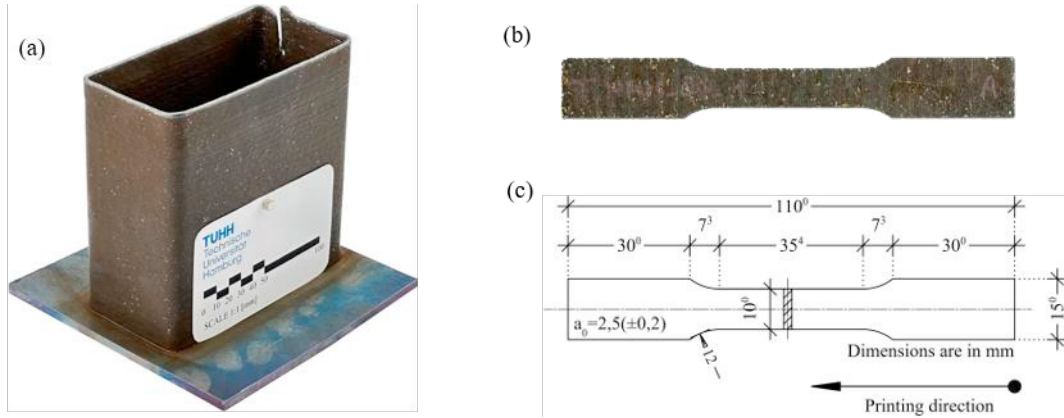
(a) WAAM rectangular prism of 2.5 mm nominal thickness by Fraunhofer IAPT; (b) Dogbone sample after cutting using Wire EDM; (c) Monotonic and fatigue dogbone specimen geometry according to DIN 50125:2022-08.
